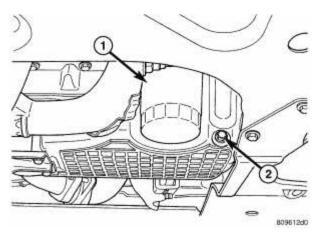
View Of Engine Oil Filter Courtesy of CHRYSLER LLC
